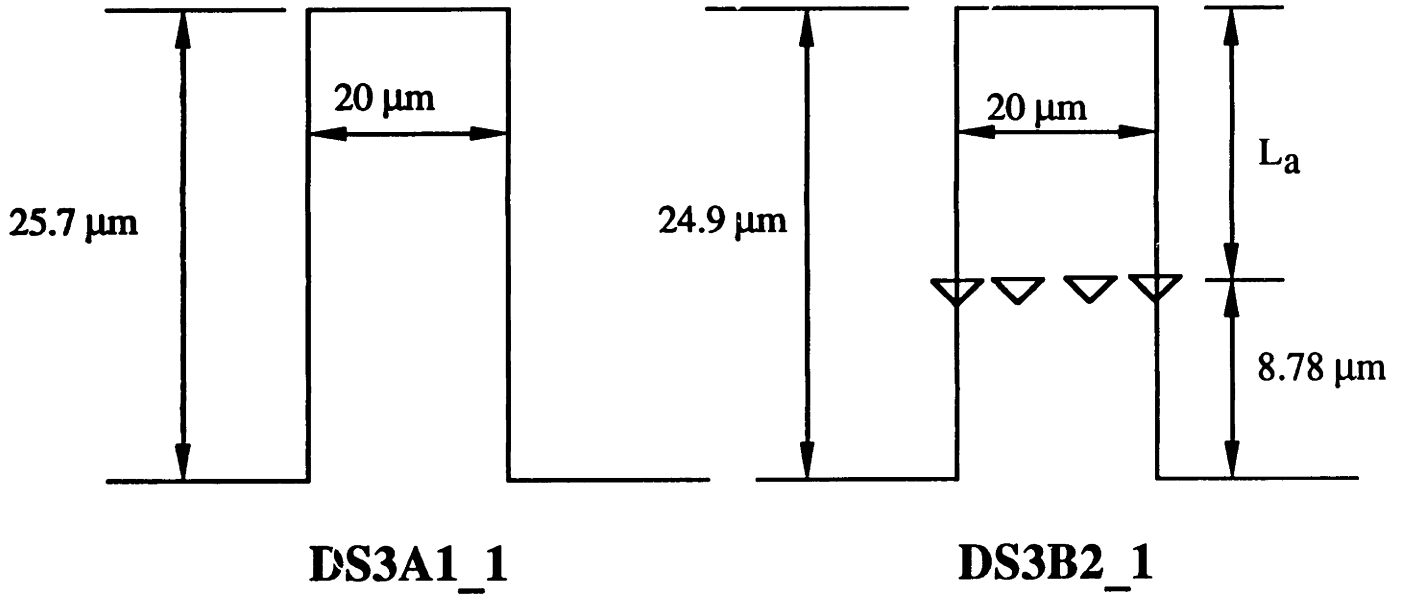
Plan View and Cross Section of DS3A1 and DS3B2
